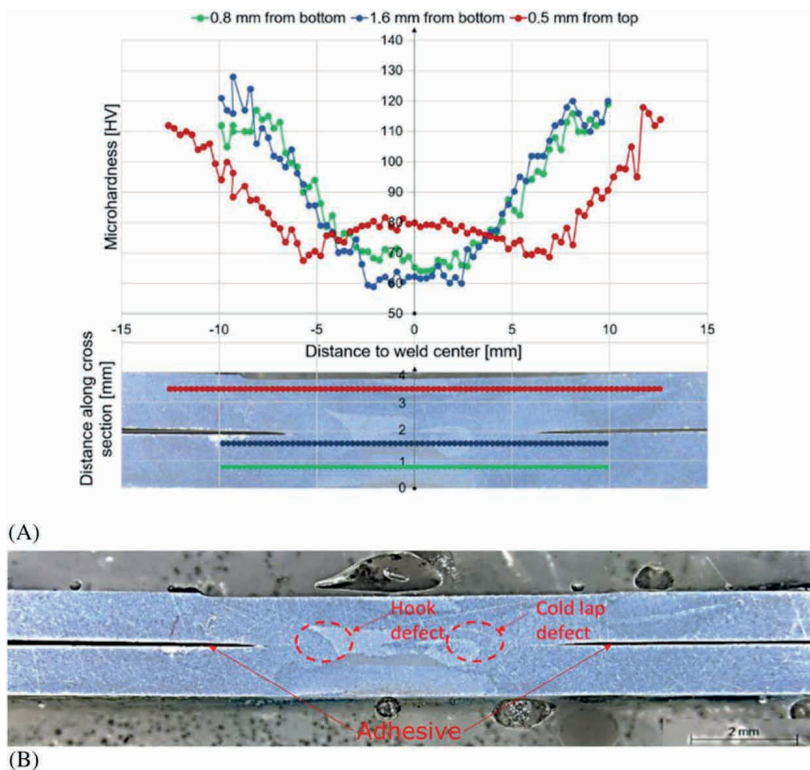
(A) Microhardness profile and (B) joint cross-section of friction stir (FS) weld-bonded joint with 450 kgf [Colour figure can be viewed at [wileyonlinelibrary.com](http://wileyonlinelibrary.com)]
